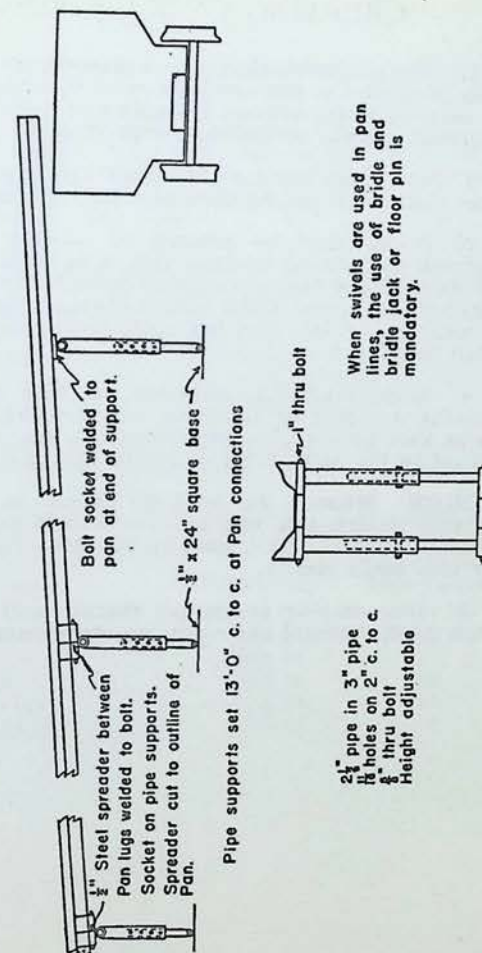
Standard Installation of Loading Head End for Shaking Conveyor Using Pipe Supports.
